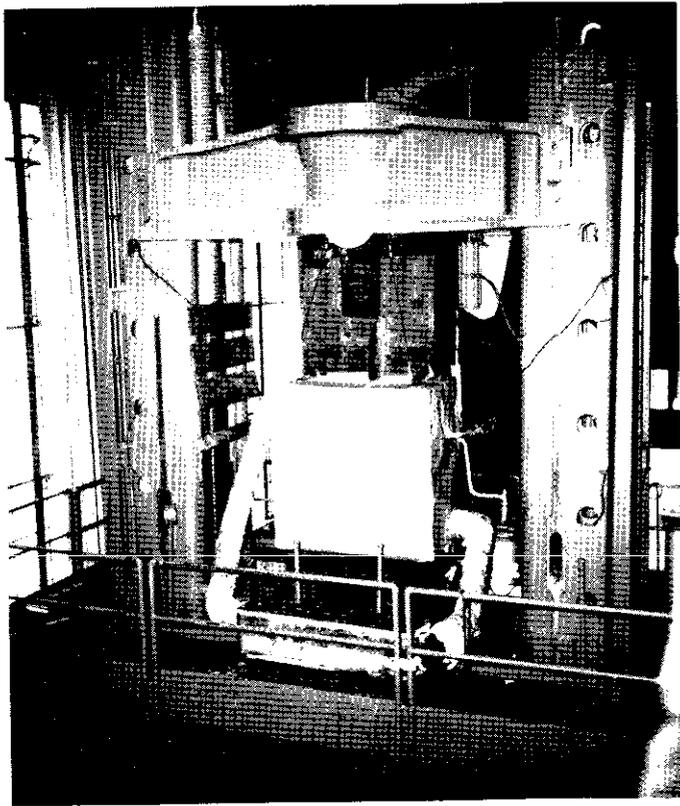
Restrained Welded Specimen Ready for Test, Showing Cooling Box, Dry Ice Heat Exchanger and Nitrogen Bottle.
